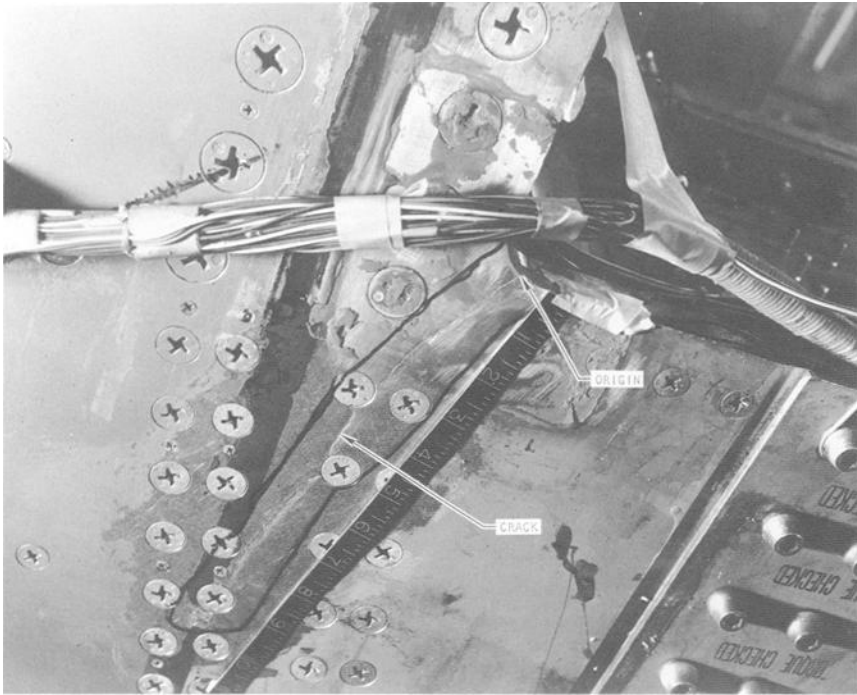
F-100 lower skin wing root fillet crack (Thunderbird crack).
